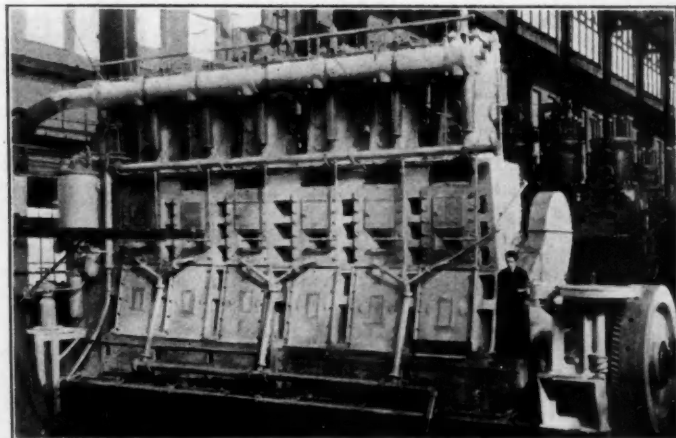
A 900-B. HP. CROSSHEAD-TYPE AMERICAN ENGINE
